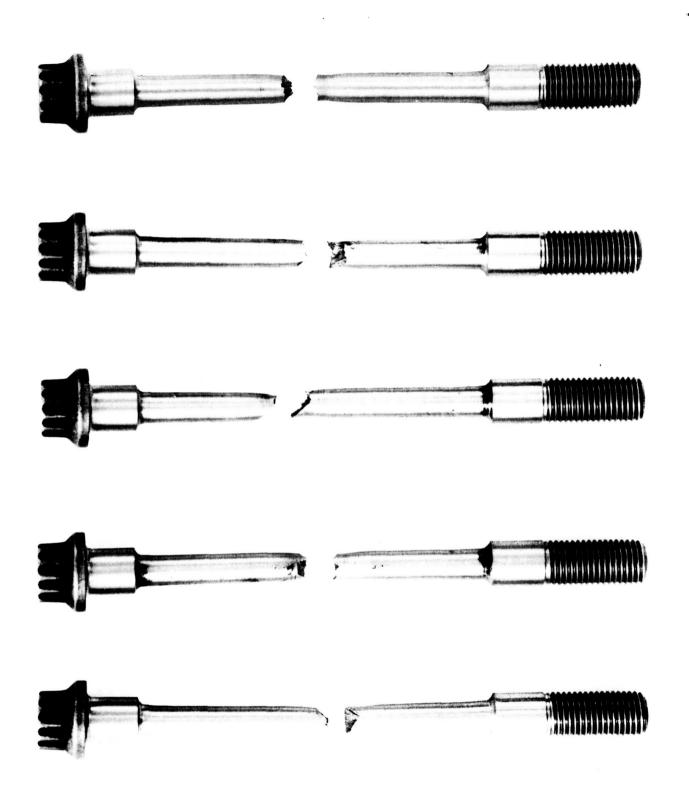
D A-286 REDUCED SHANK BOLT SPECIMENS TESTED AT -320°F (-196°C)
